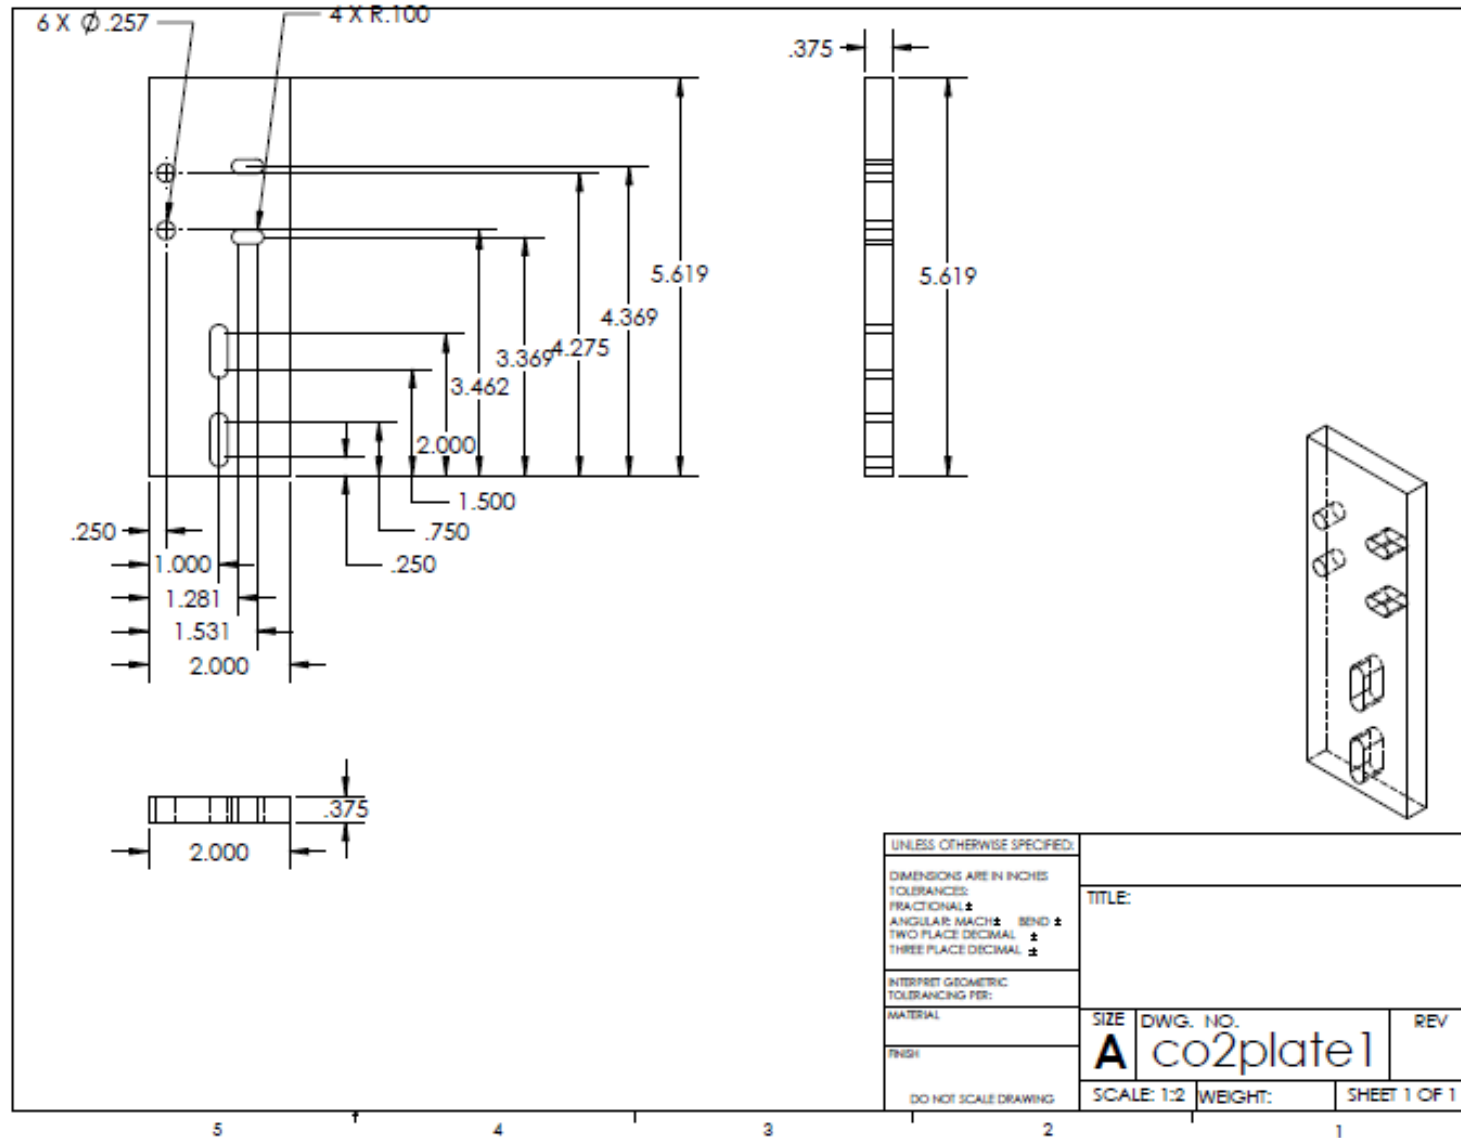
Engineering drawing of teh supercritical CO₂ plate #1
